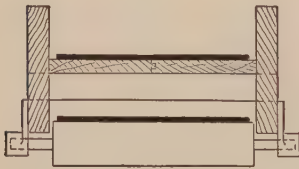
Conveyor Belt Sliding in Wood Trough, 1830.
